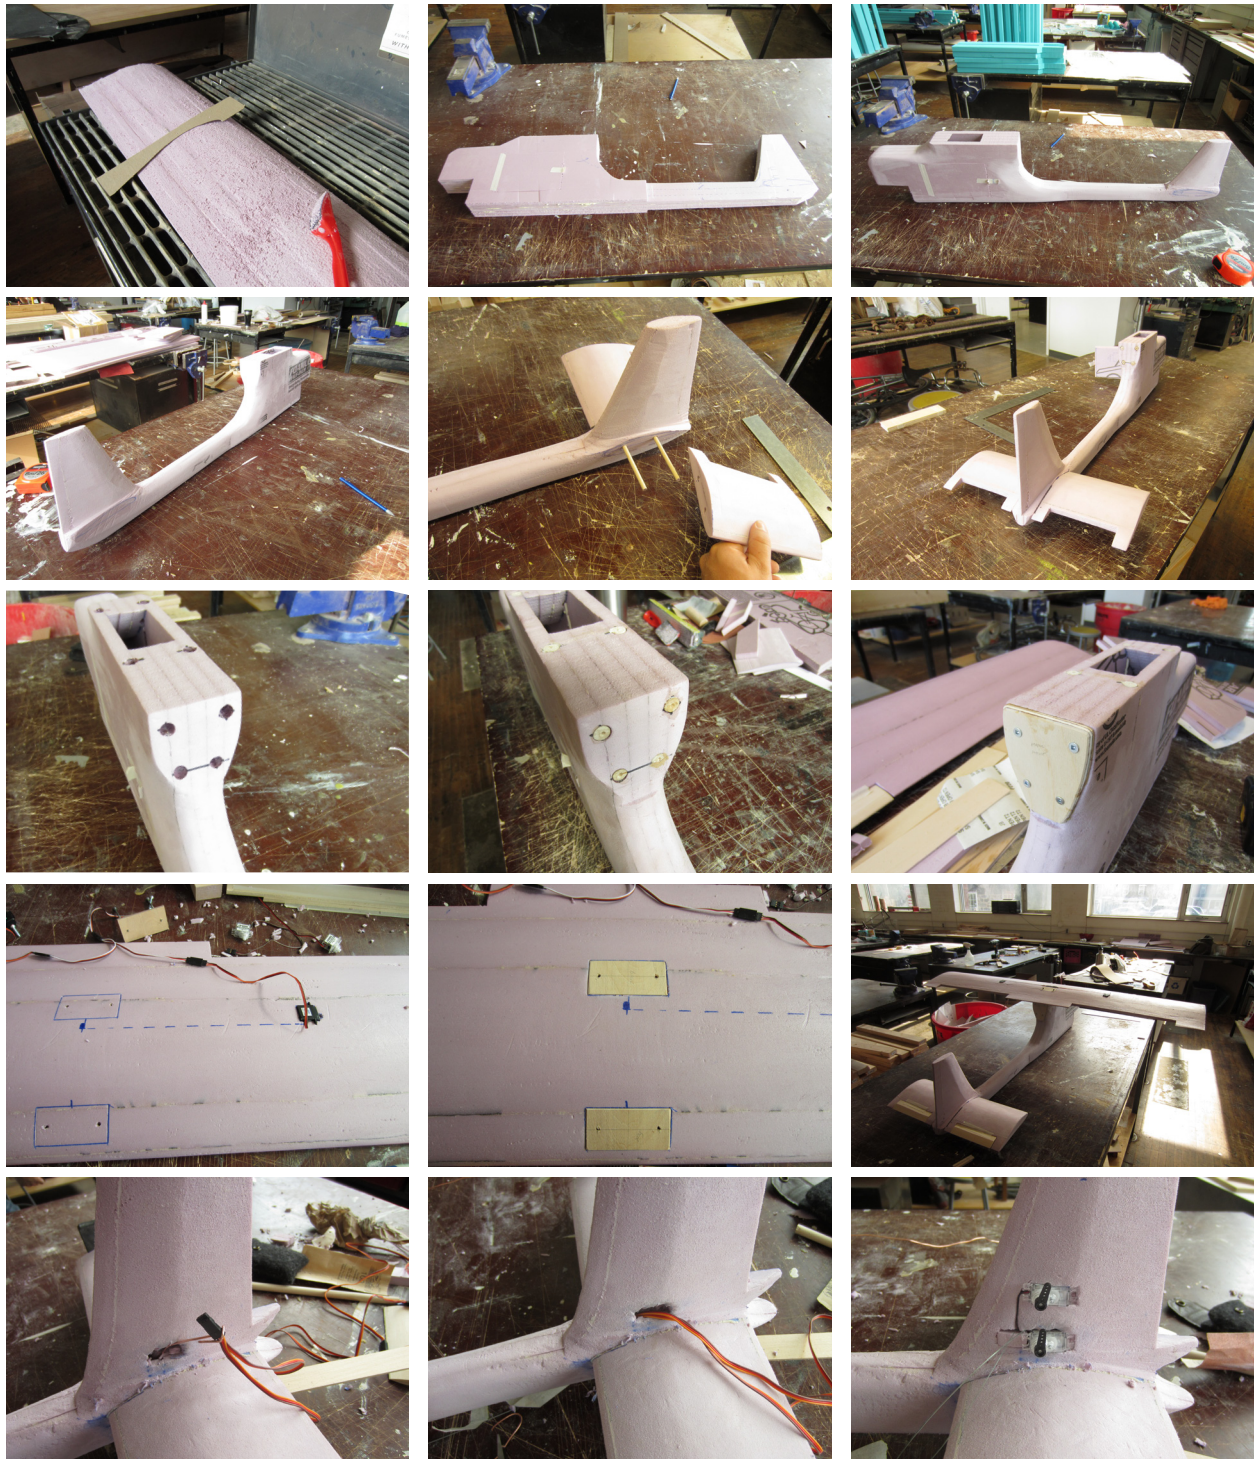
Plane Construction Progress. *Photos by Author.
